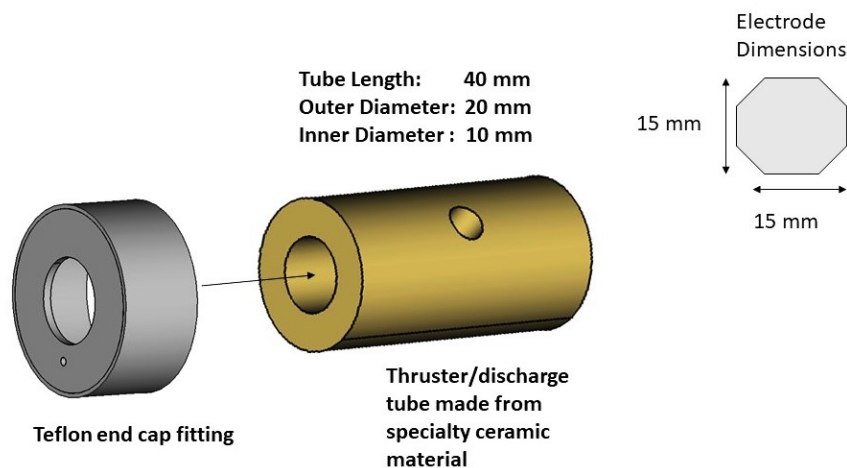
Geometry of the discharge tube (thruster body), end cap fittings and electrode dimensions used in this research. Note that the dimensions were measured using a vernier caliper which gives a reading error of 0.05 mm and thus the actual dimensions are accurate to ± 0.05 mm to those quoted above.
